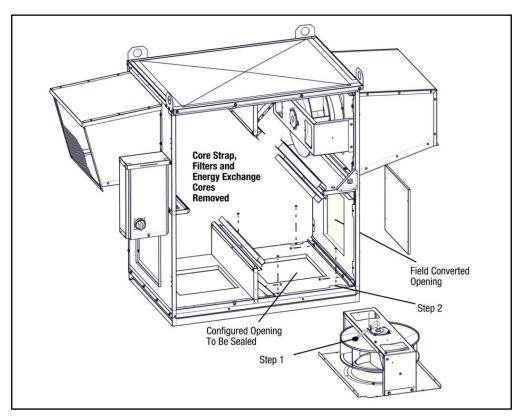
EXAMPLE OF CONVERTING VERTICAL OPENING TO HORIZONTAL OPENING
